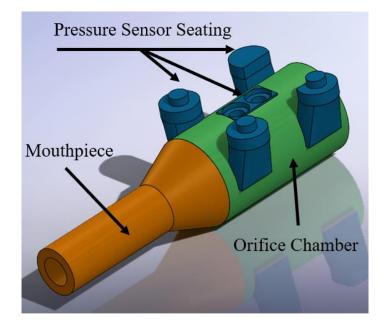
Illustration of the sub-design parts of the "Mouthpiece attachment".
